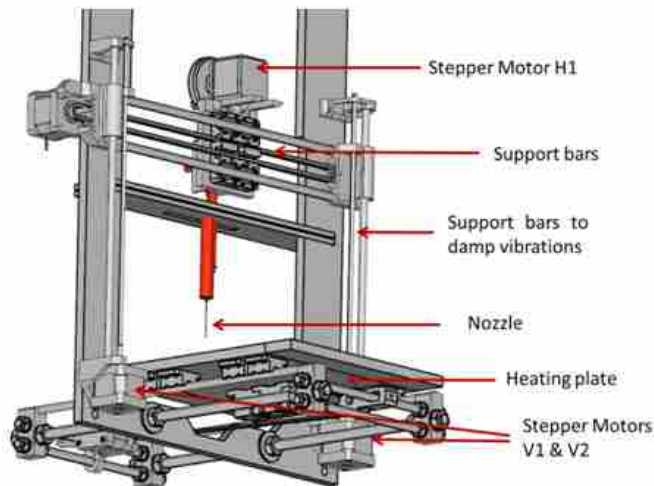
Patented Design of the 3D Printer to Print Solar Panels
